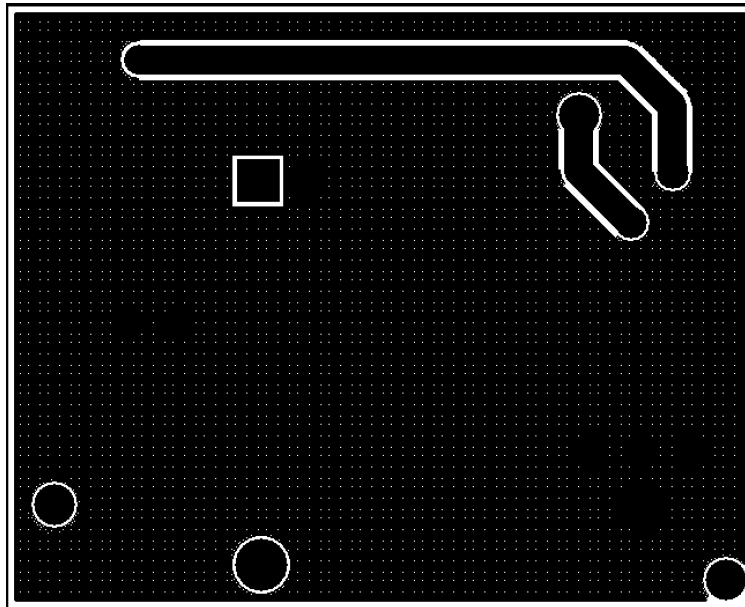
LM3489 Demonstration Board PCB Top Overlay
